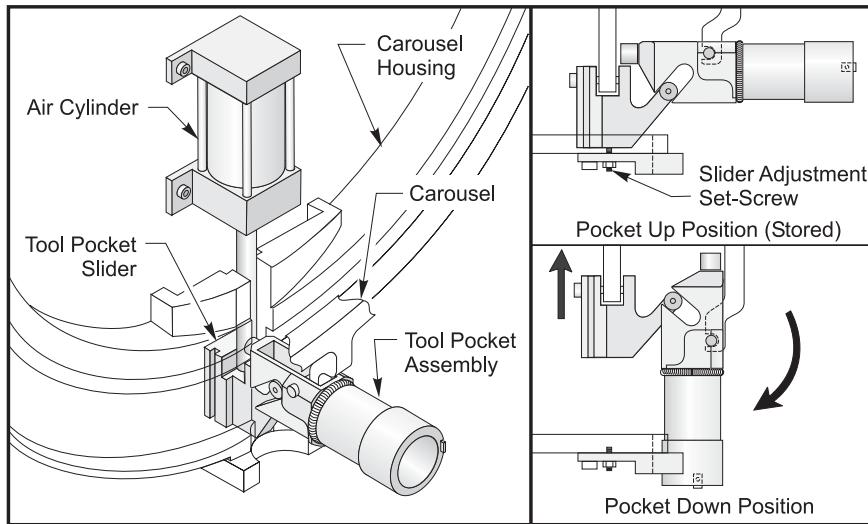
Tool Pocket Orientation / Set-Screw Adjustment
